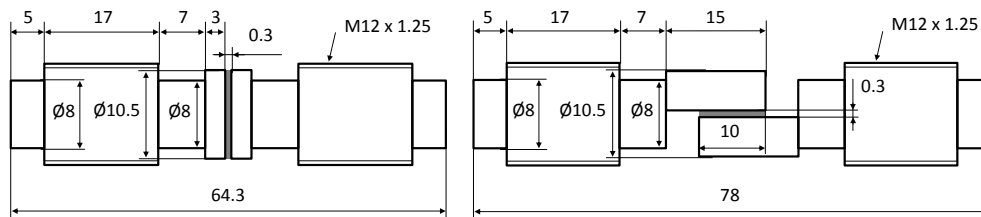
Specimen geometry of the butt joint (left) and the lap shear specimen (right) [68].
